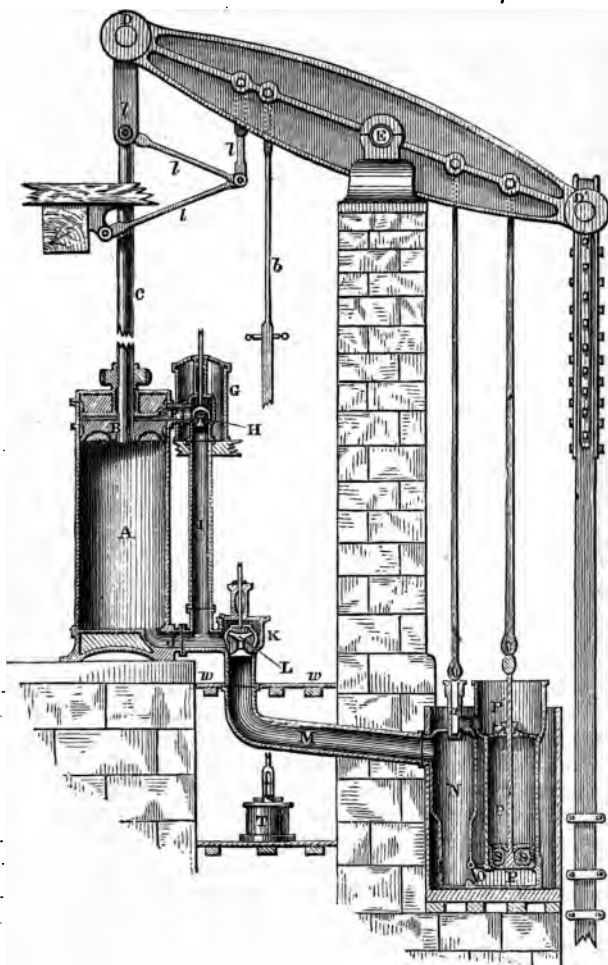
ELEVATION (part sectional) of a CORNISH PUMPING ENGINE.
